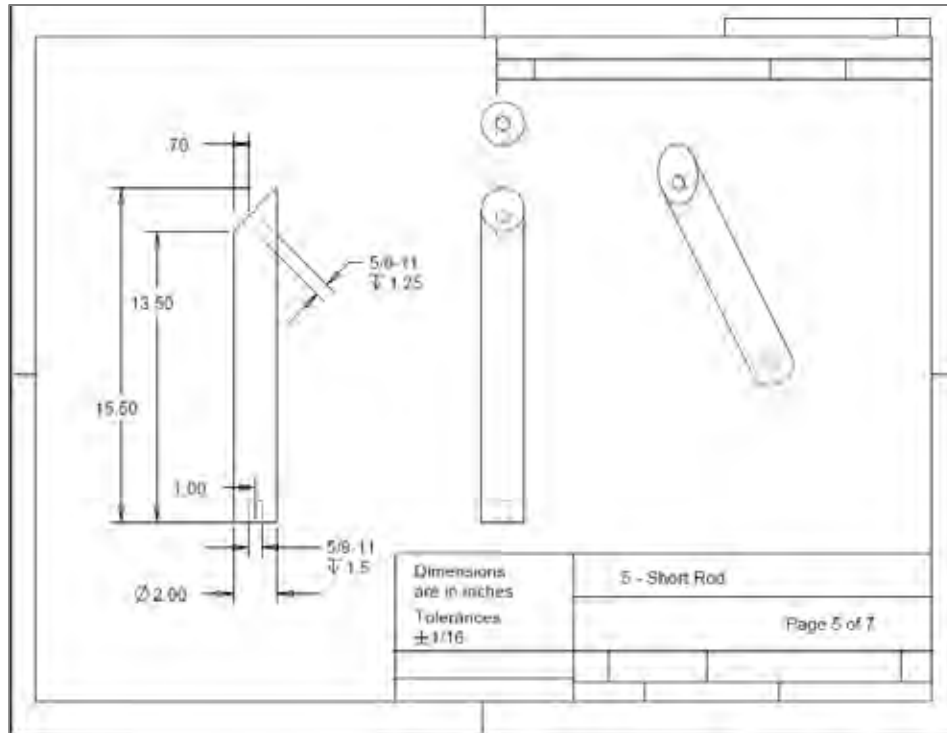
Fixture Support Short Rod for 45-Degree Angle Penetration Test Setup
